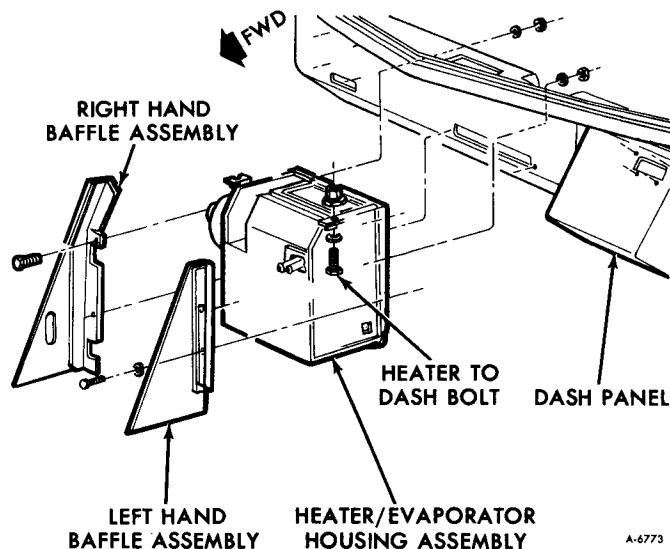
Heater/Evaporator Housing Assembly with Baffles (403 cu. in. Engine)
